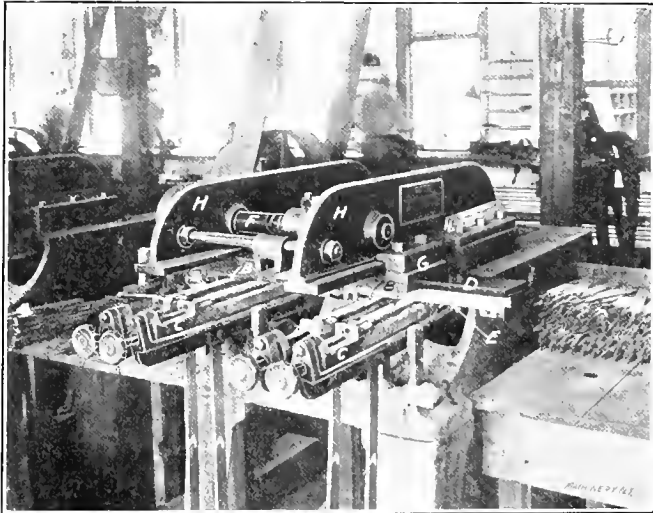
Stripping Machine for Draw Filing the Blanks.
